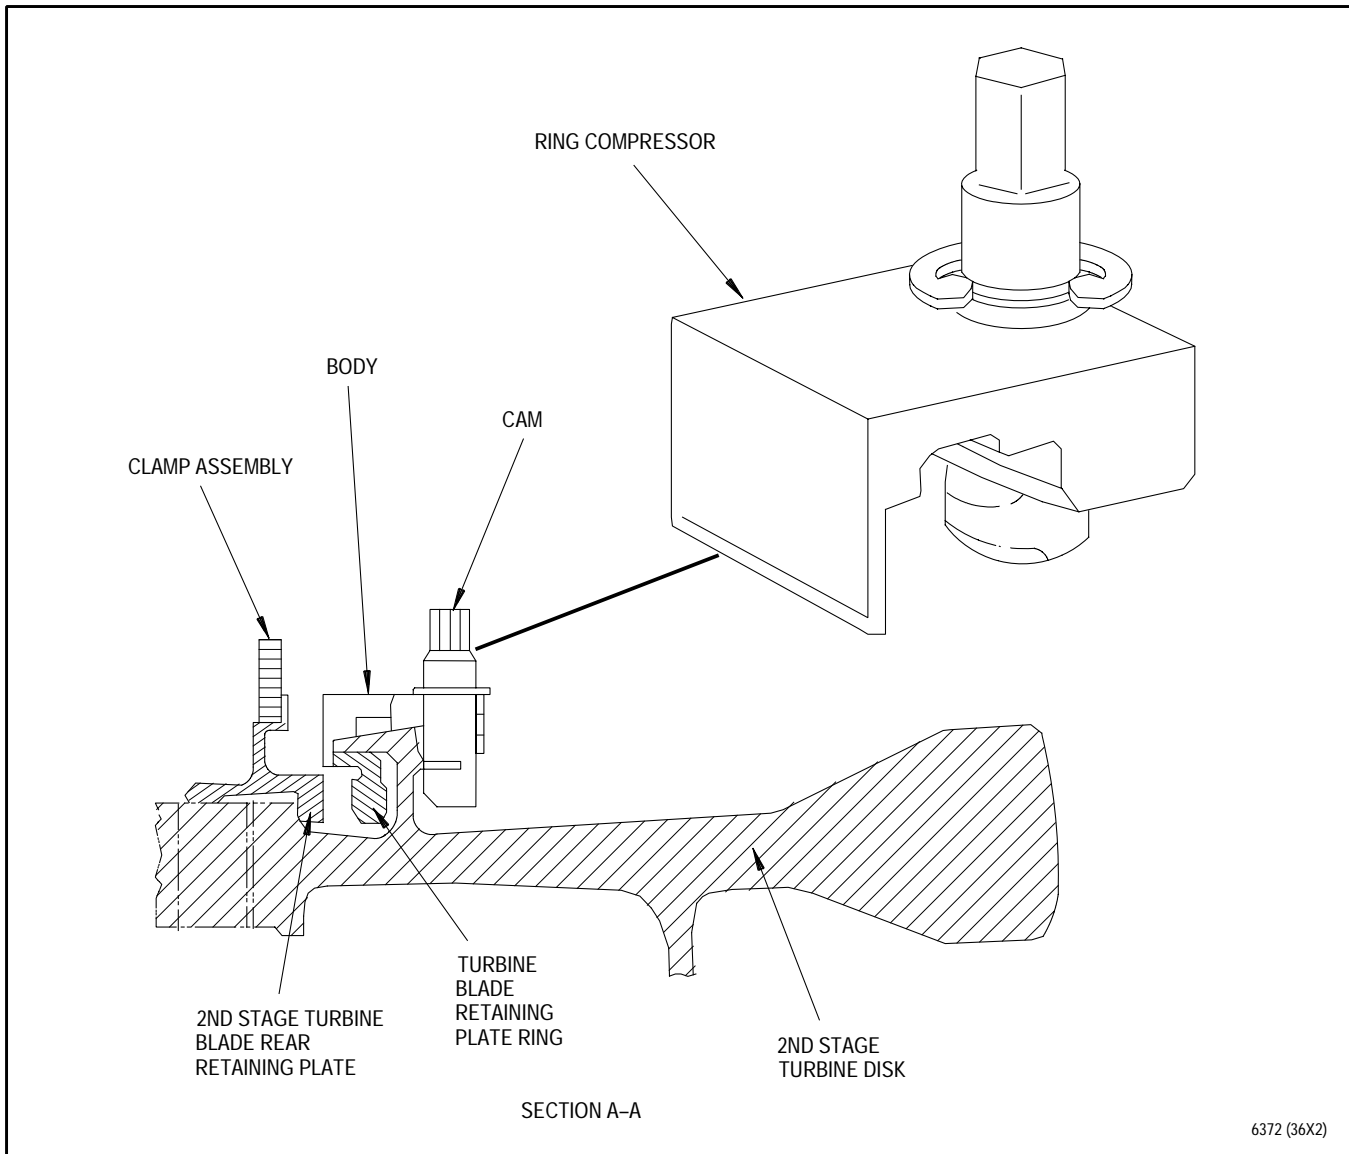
Ring Compressors - Installation (Sheet 1 of 2)
